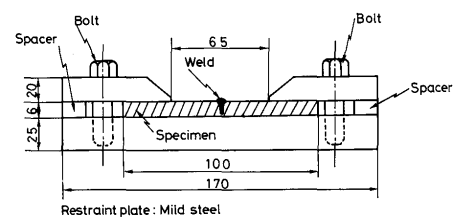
Shape and size of restraint fixture made of mild steel used in LBW.
